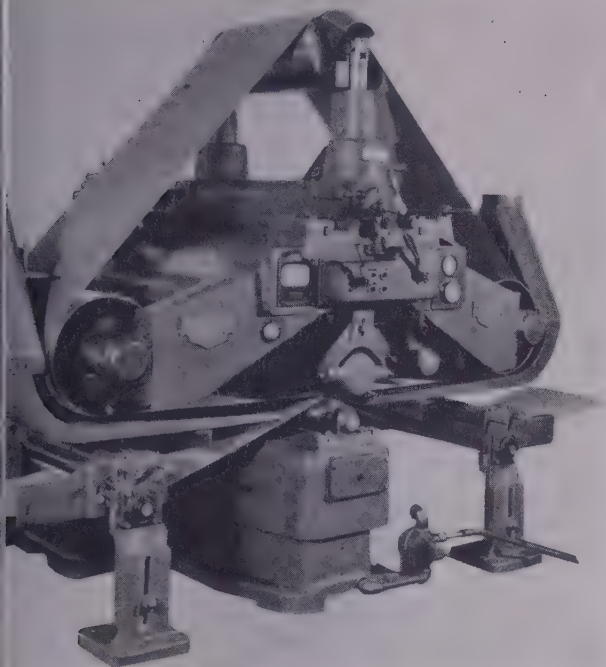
Abrasive belt polishing head for processing coiled product. Mattison Machine photo
